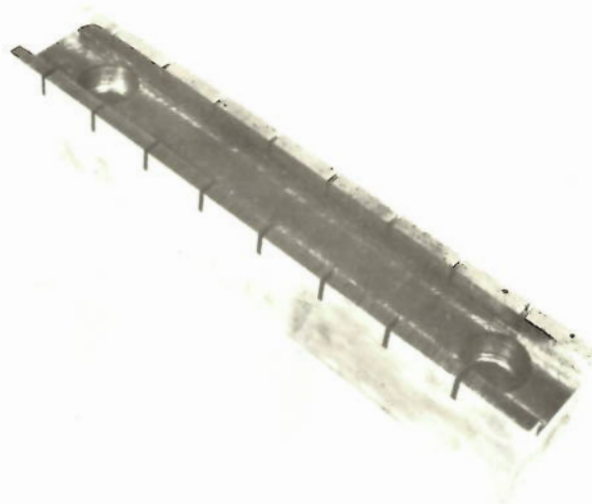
TEST PIECE FOR BROACHING MACHINE
